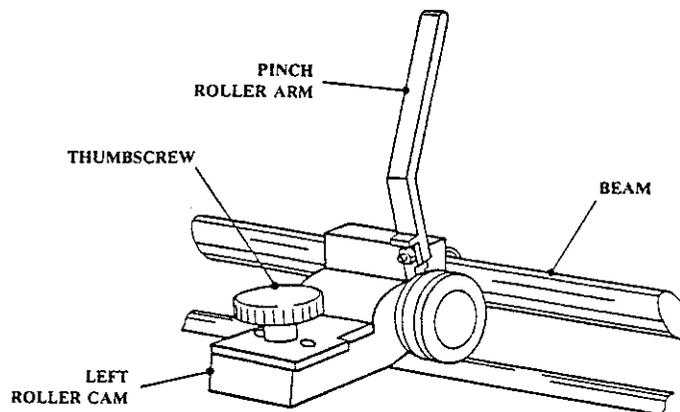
DMP-60C SERIES PINCH ROLLER ASSEMBLY THUMBSCREW
